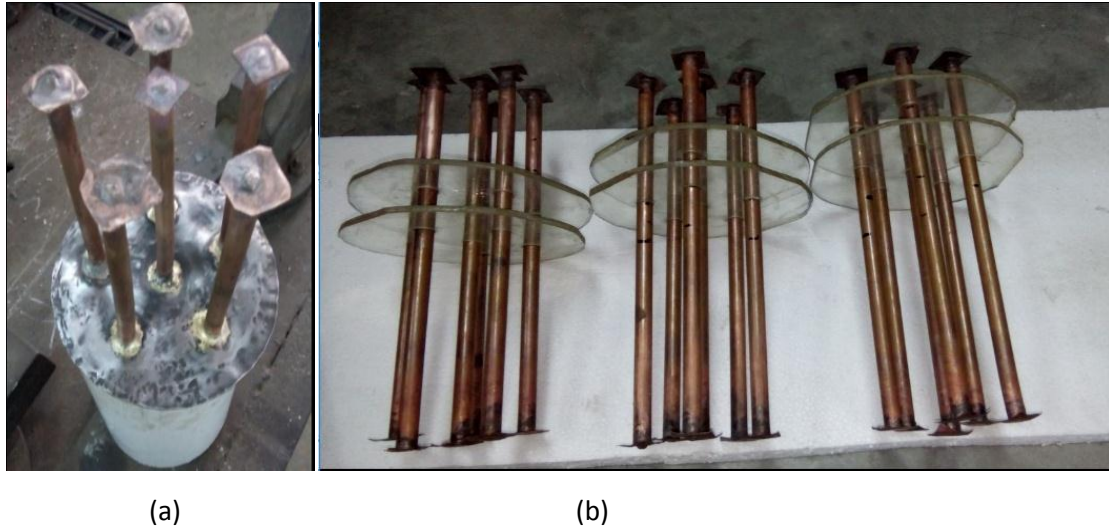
(a) Heat pipes assembly on Steel Plate; (b) Heat pipes assembly on Acrylic Sheet
